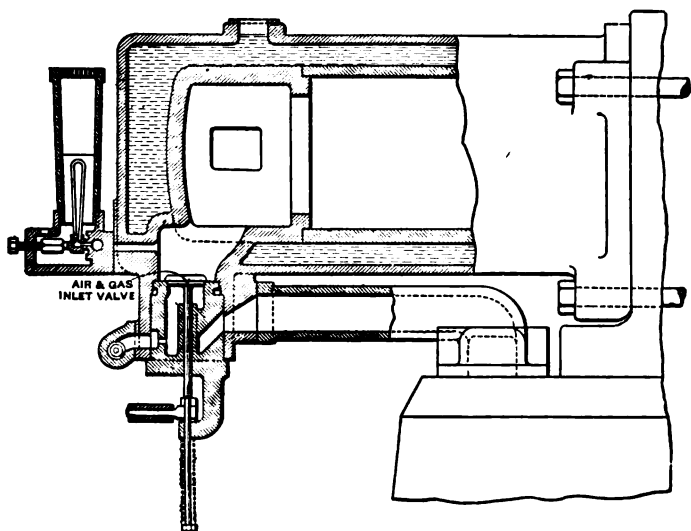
Vertical section through end of cylinder of Crossley-Otto Engine.
